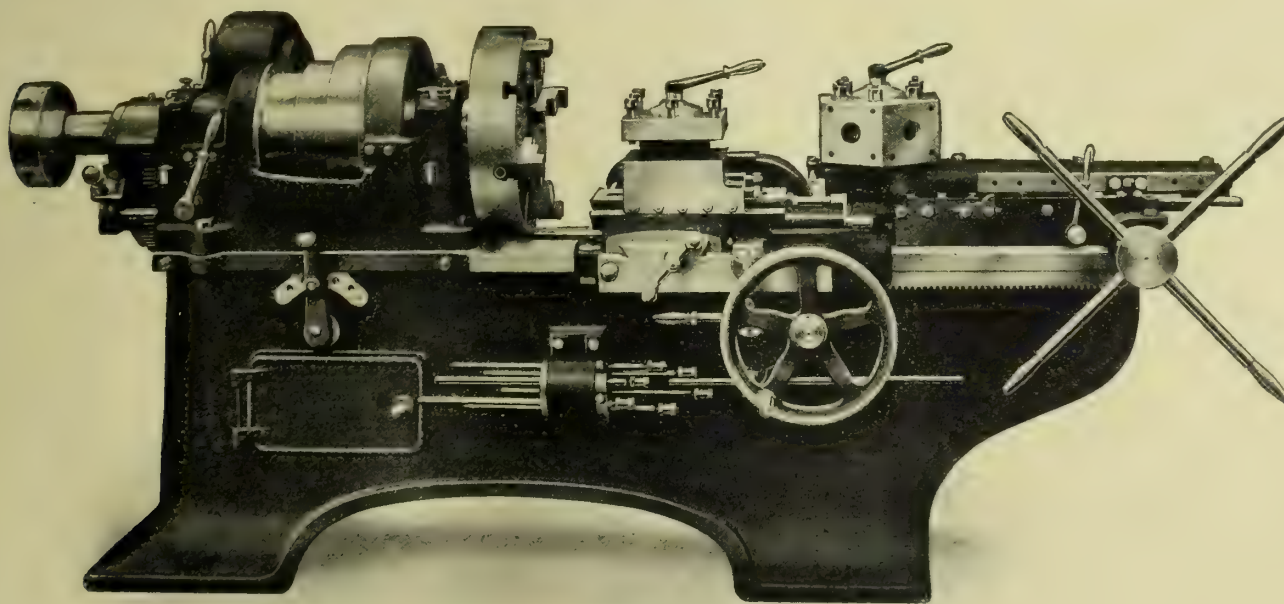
19 IN. SWING TURRET LATHE. MESSRS. DENHAM'S ENGINEERING COMPANY, LTD., HALIFAX.
